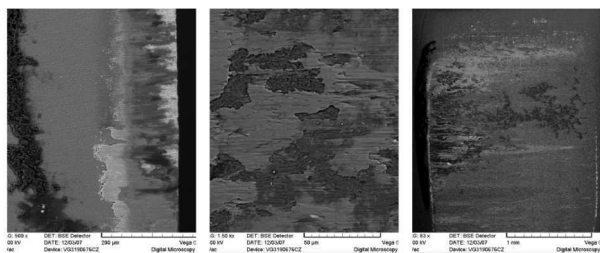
Wearing example of backs, guides and head of reaming head tool MT3 [9]
